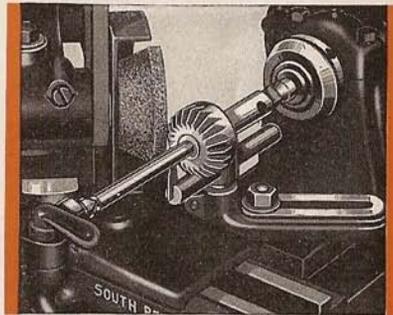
Sharpening a Valve Seat Reamer in Lathe Using a Cup Shaped Abrasive Wheel.
